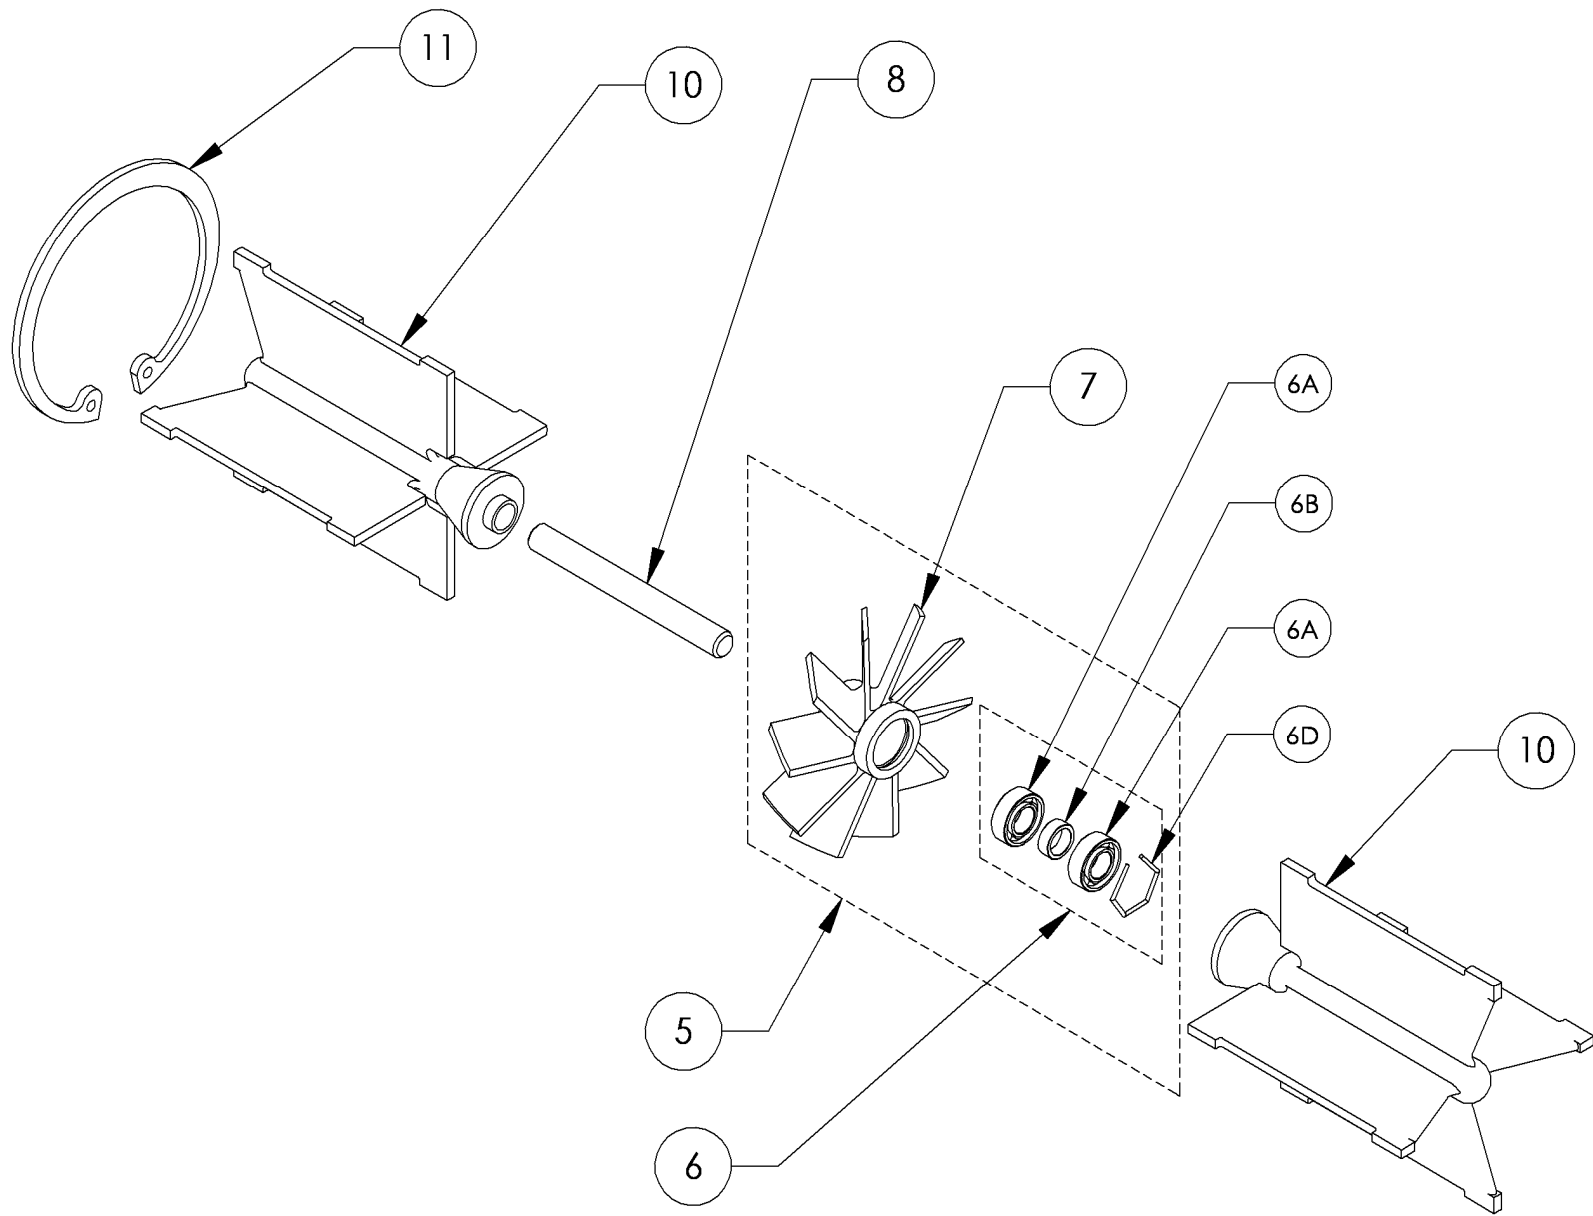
HS-32 Ball Bearing Internal Assembly (Bearing Code A)
